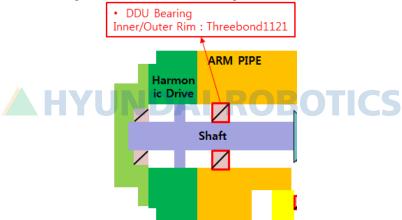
R1-axis reduction gear Three Bond coating detail [HH007C]
